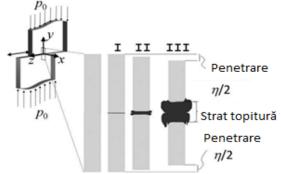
The evolution of the macroscopic appearance that occurs in the area of the weld seam during vibration welding. The scheme shows the cross-section of the weld area in plane x - y with the vibration carried out in the direction z, [2].
